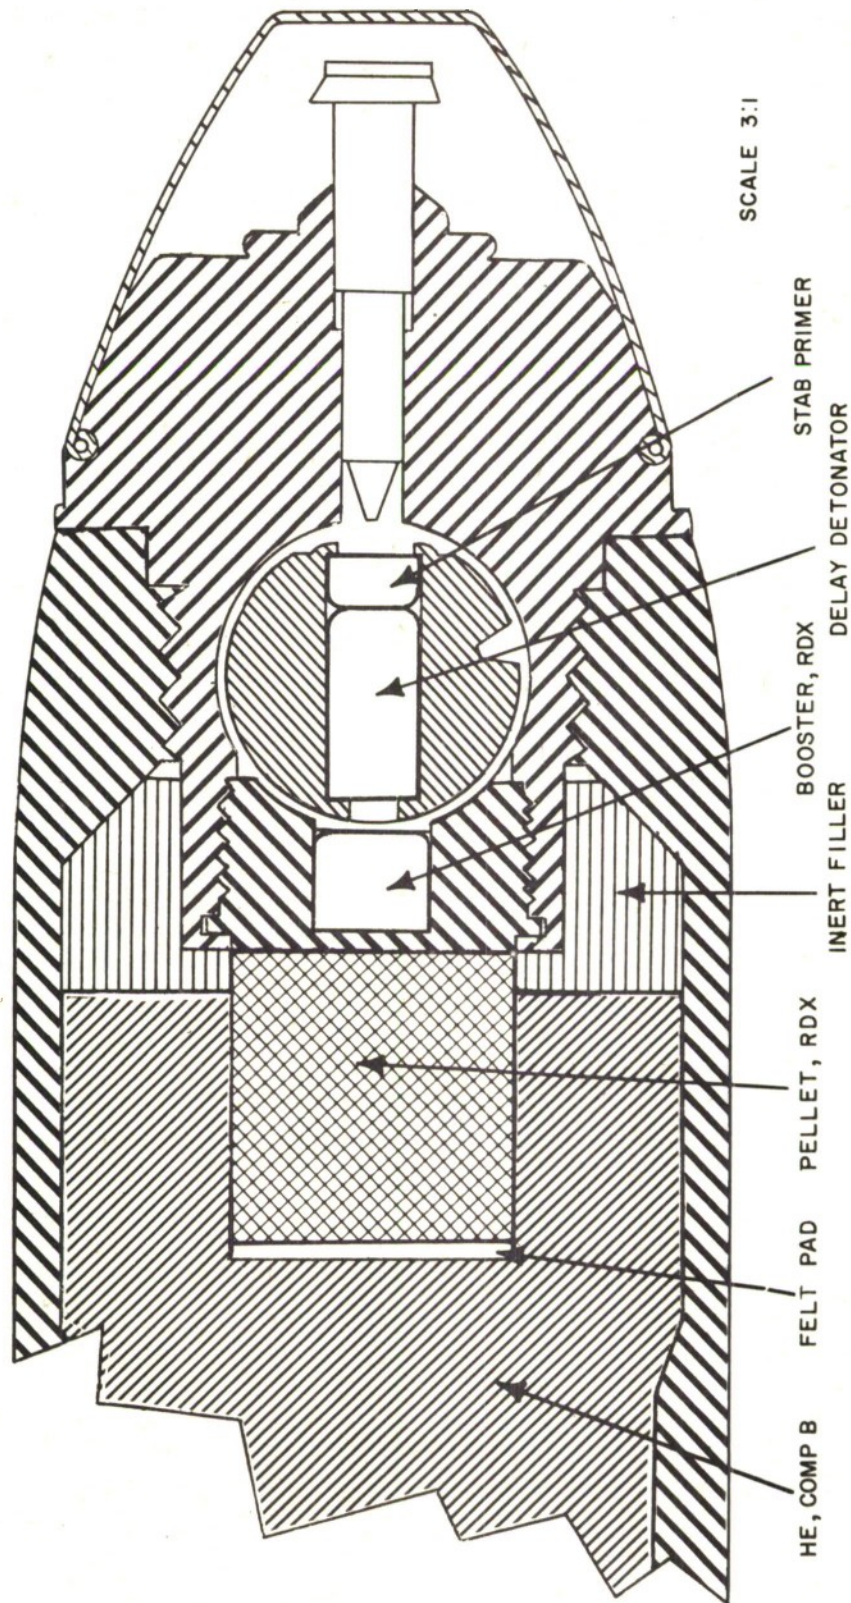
EXPLOSIVE TRAIN SCHEMATIC, 30-MM TEST PROJECTILE
